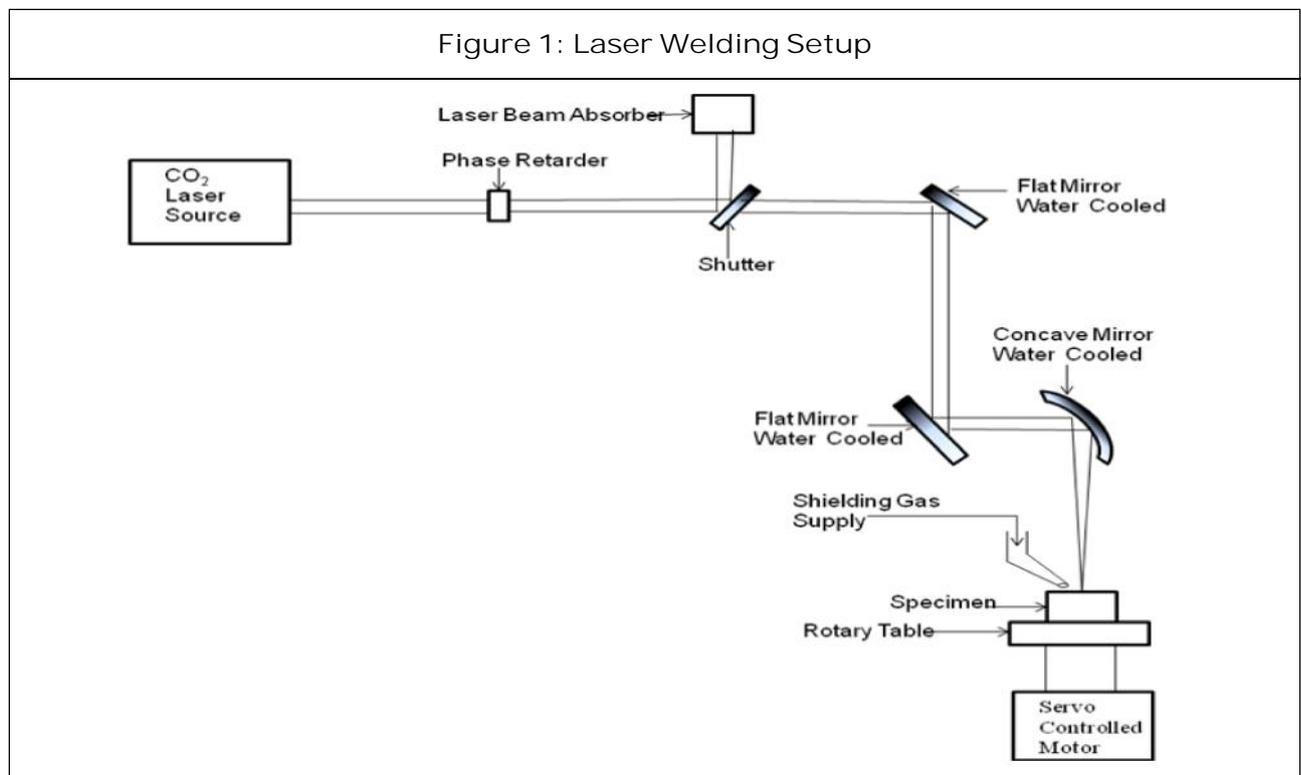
shows the setup of laser welding experimentation. Table 1 shows the composition in Wt % and Table 2 shows the mechanical properties of 20MnCr5 alloy steel. The pre laser welding activities includes the press fitting of gear and synchro ring followed by washing with 0.8% soap solution and drying with hot air blower at 100 °C. The laser gas composition involved varying percentages of He, O₂, Xe, CO₂, CO and N₂. The chamber contains laser gas, having pressure of 200 hPa. Shielding gas kept at pressure of 1.5 bar, its composition having Helium (30%) and Argon (70%) and the average flow is 15 liters/min. Chill water flow rate was 2 liters/min and it kept at a temperature of 25 °C. Laser beam wavelength is 10.6µm, diameter range was 20-25 mm and it was kept at 20 mm for the experiments, frequency is 5000 Hz, and the Laser power ranges from 250 to 2500 watts. The Focal distance was 250 mm and focal point kept at 1 mm below from the surface of the component to be welded with 0.1 mm diameter to produce high power density.
